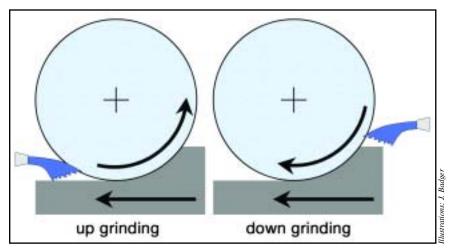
The direction of the grinding wheel and workpiece when up grinding and down grinding.
